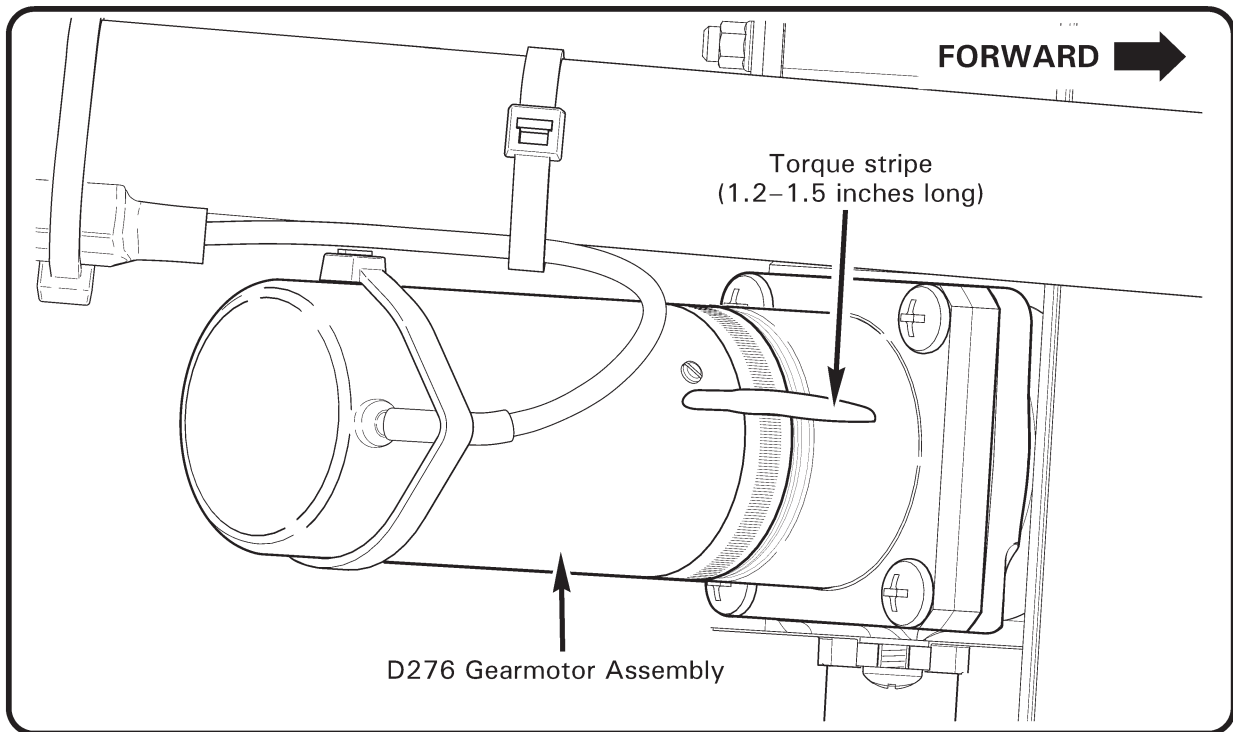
A GEARMOTOR ASSEMBLY TORQUE STRIPE
